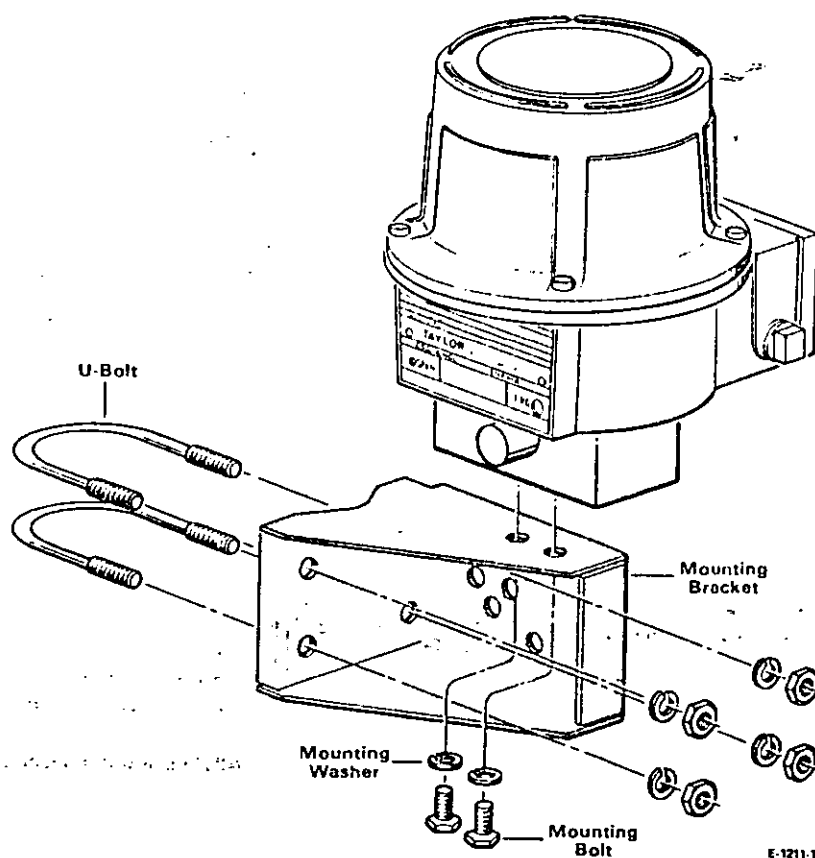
Assembling Optional Mounting Bracket Kit, Accessory (146)
